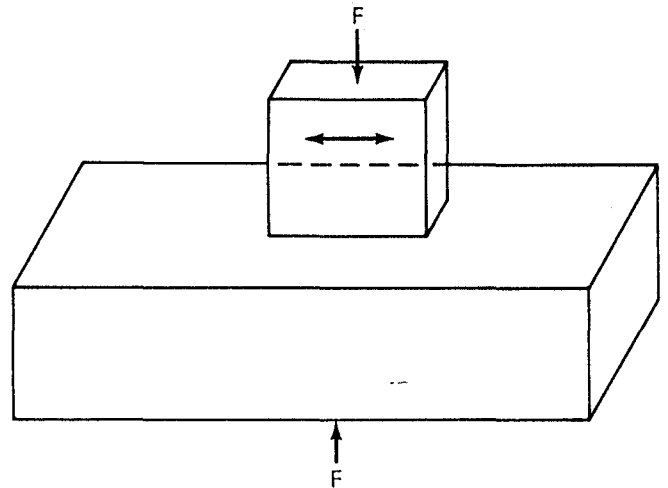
C—Linear Reciprocating Friction Welding
